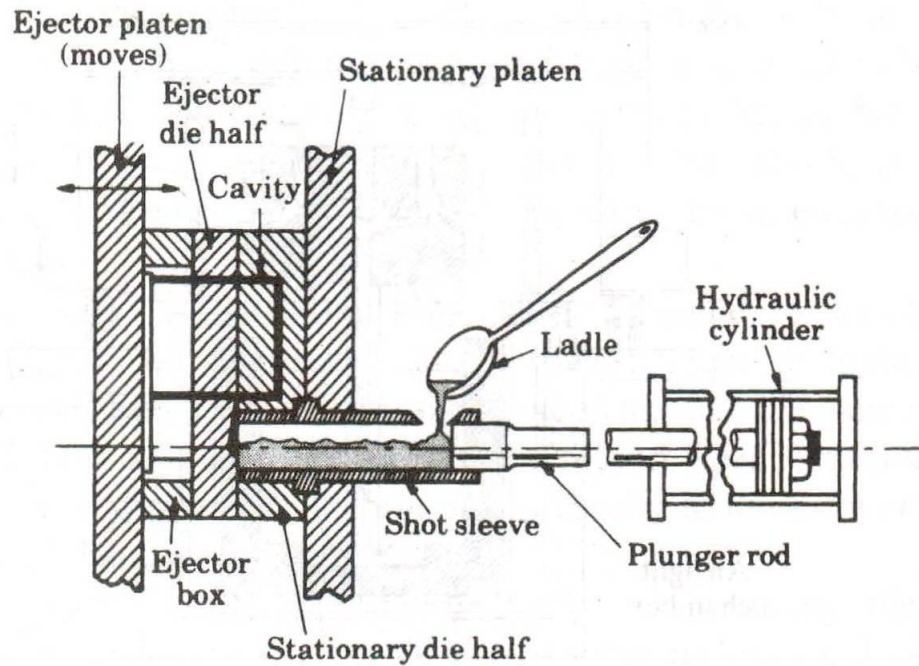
Schematic illustration of the cold-chamber die-casting process
